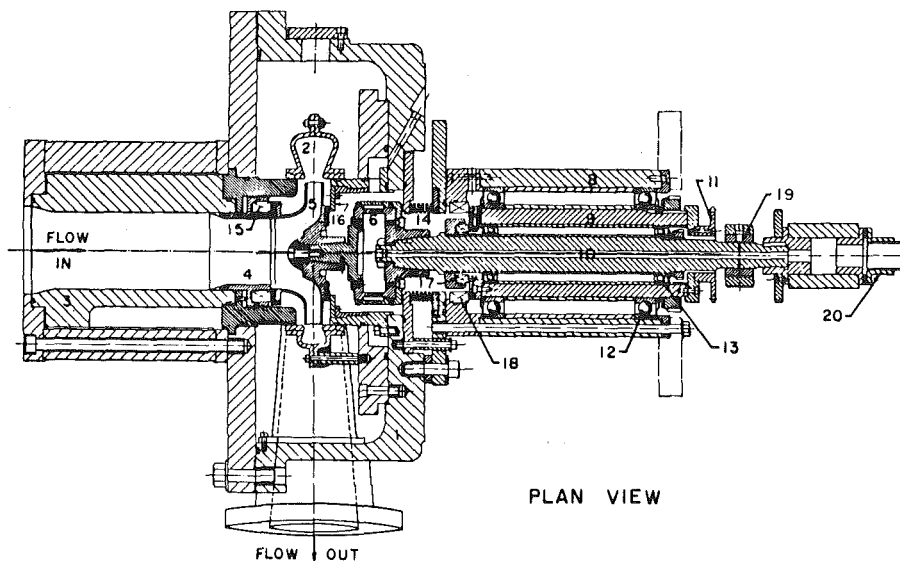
Assembly drawing of the test section and the eccentric drive mechanism. Pump housing (1), volute (2), inlet connection (3), inlet bell (4), impeller (5), rotating dynamometer (6), eccentric drive mechanism: outer and inner bearing carriers (8 and 9), main shaft (10), orbiting motion sprocket (11), outer and inner bearing sets (12 and 13), bellows (14), impeller front face seal (15), back seal (16), eccentric drive inner and outer face seals (17 and 18), air bearing stator (19), flexible coupling (20).
